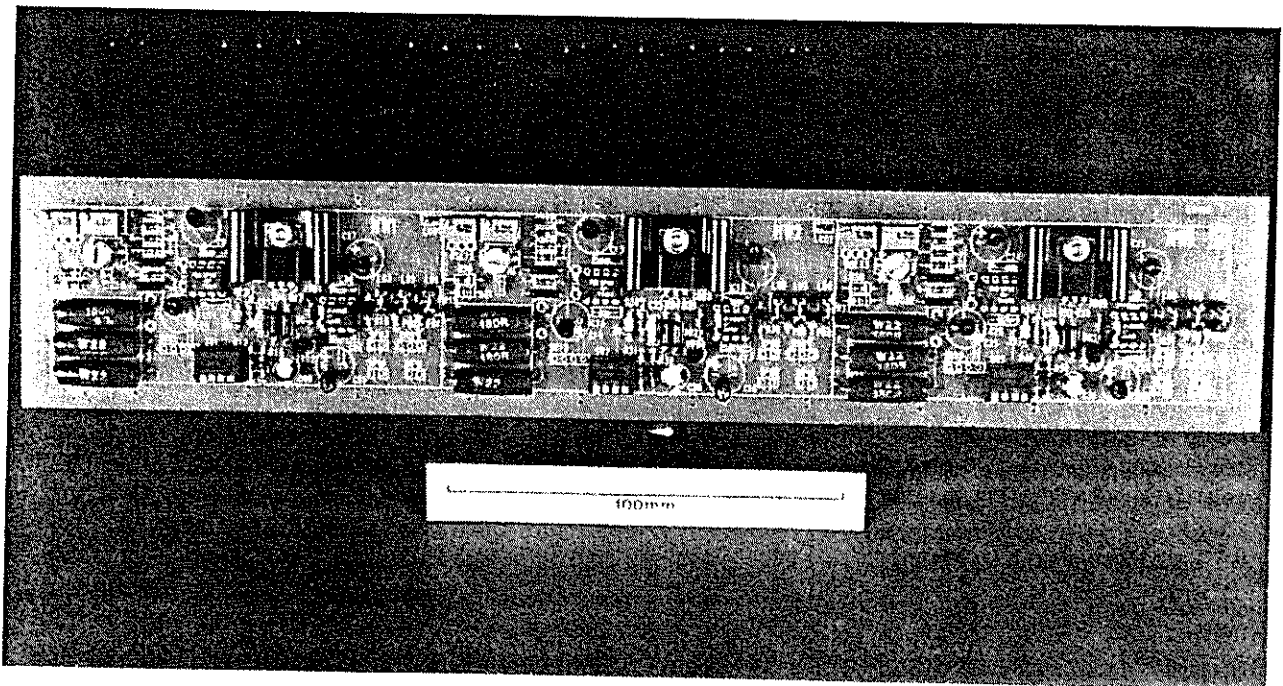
Photograph Of The "In-Shaft" Anemometer PCB
